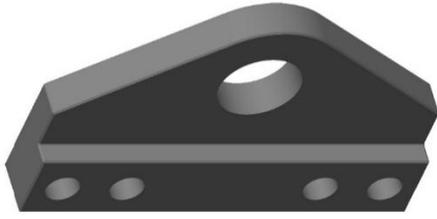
3D representation of the Fastening Lug Industrial Spare Part
